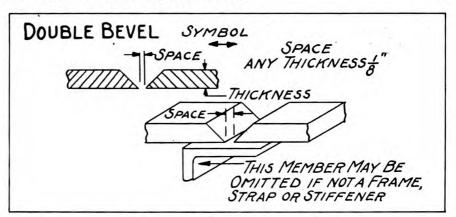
DOUBLE BEVEL DESIGN OF ELECTRIC WELD
